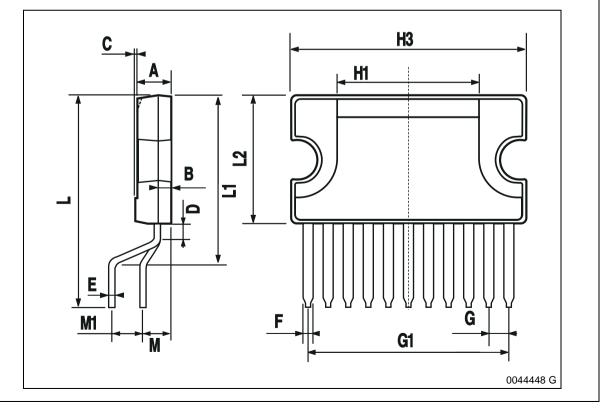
Clipwatt11 Mechanical Data & Package Dimensions
